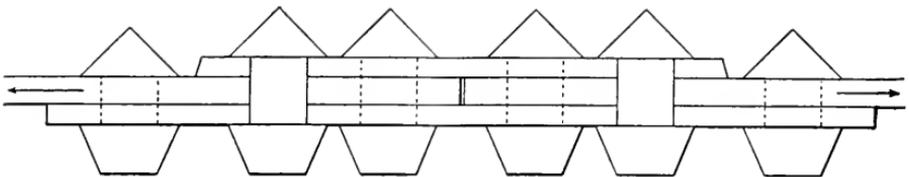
DOUBLE-STRAP BUTT JOINT.
